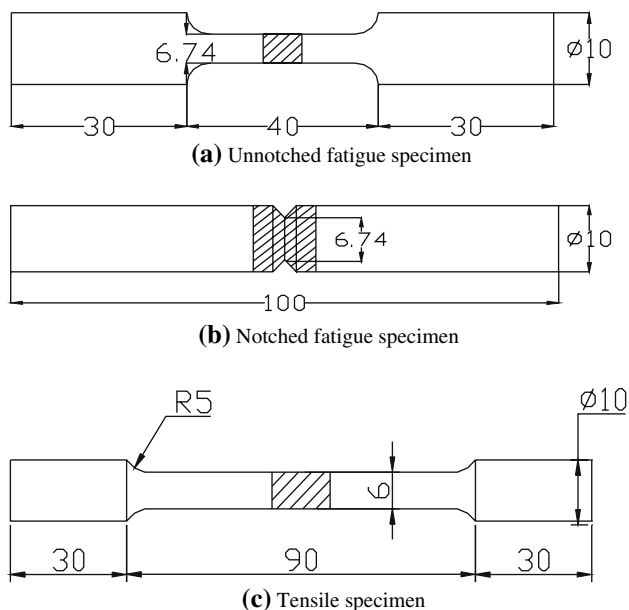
Dimensions of fatigue and tensile specimens; (a) unnotched fatigue specimen, (b) notched fatigue specimen, and (c) tensile specimen (all the dimensions are in mm)
